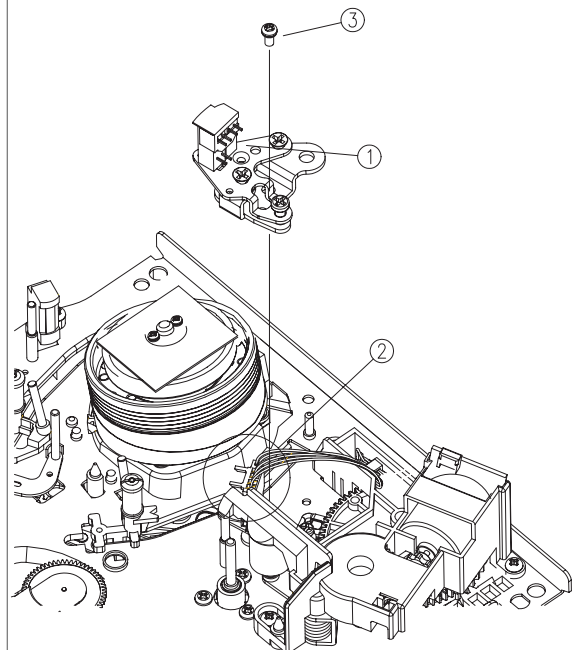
Disassembly of the AC HEAD ASS'Y
